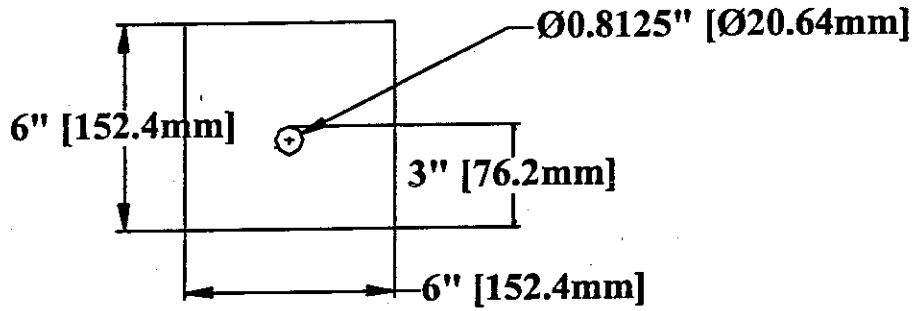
Small Piece for Cube Formwork Showing Dimensions and Hole Locations
